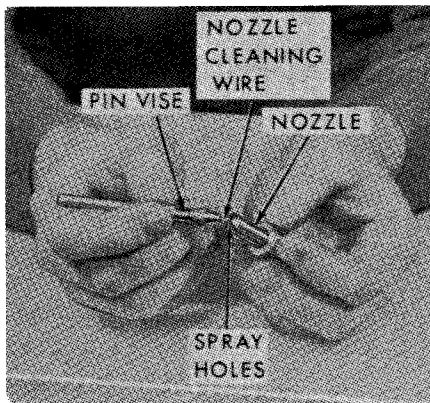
Cleaning nozzle spray holes with wire probe held in pin vise.
